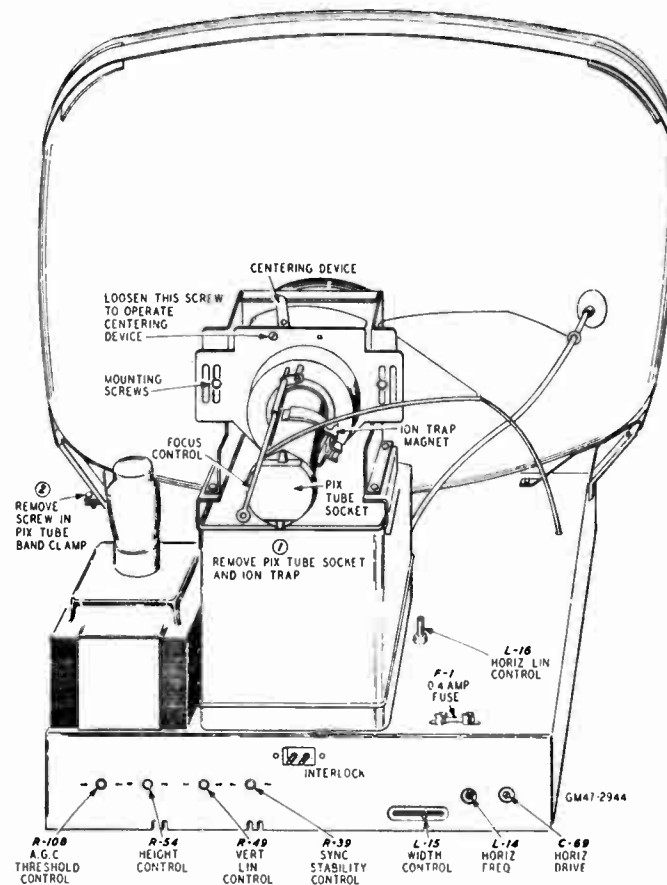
Removal of Picture Tube and Rear Chassis Controls
